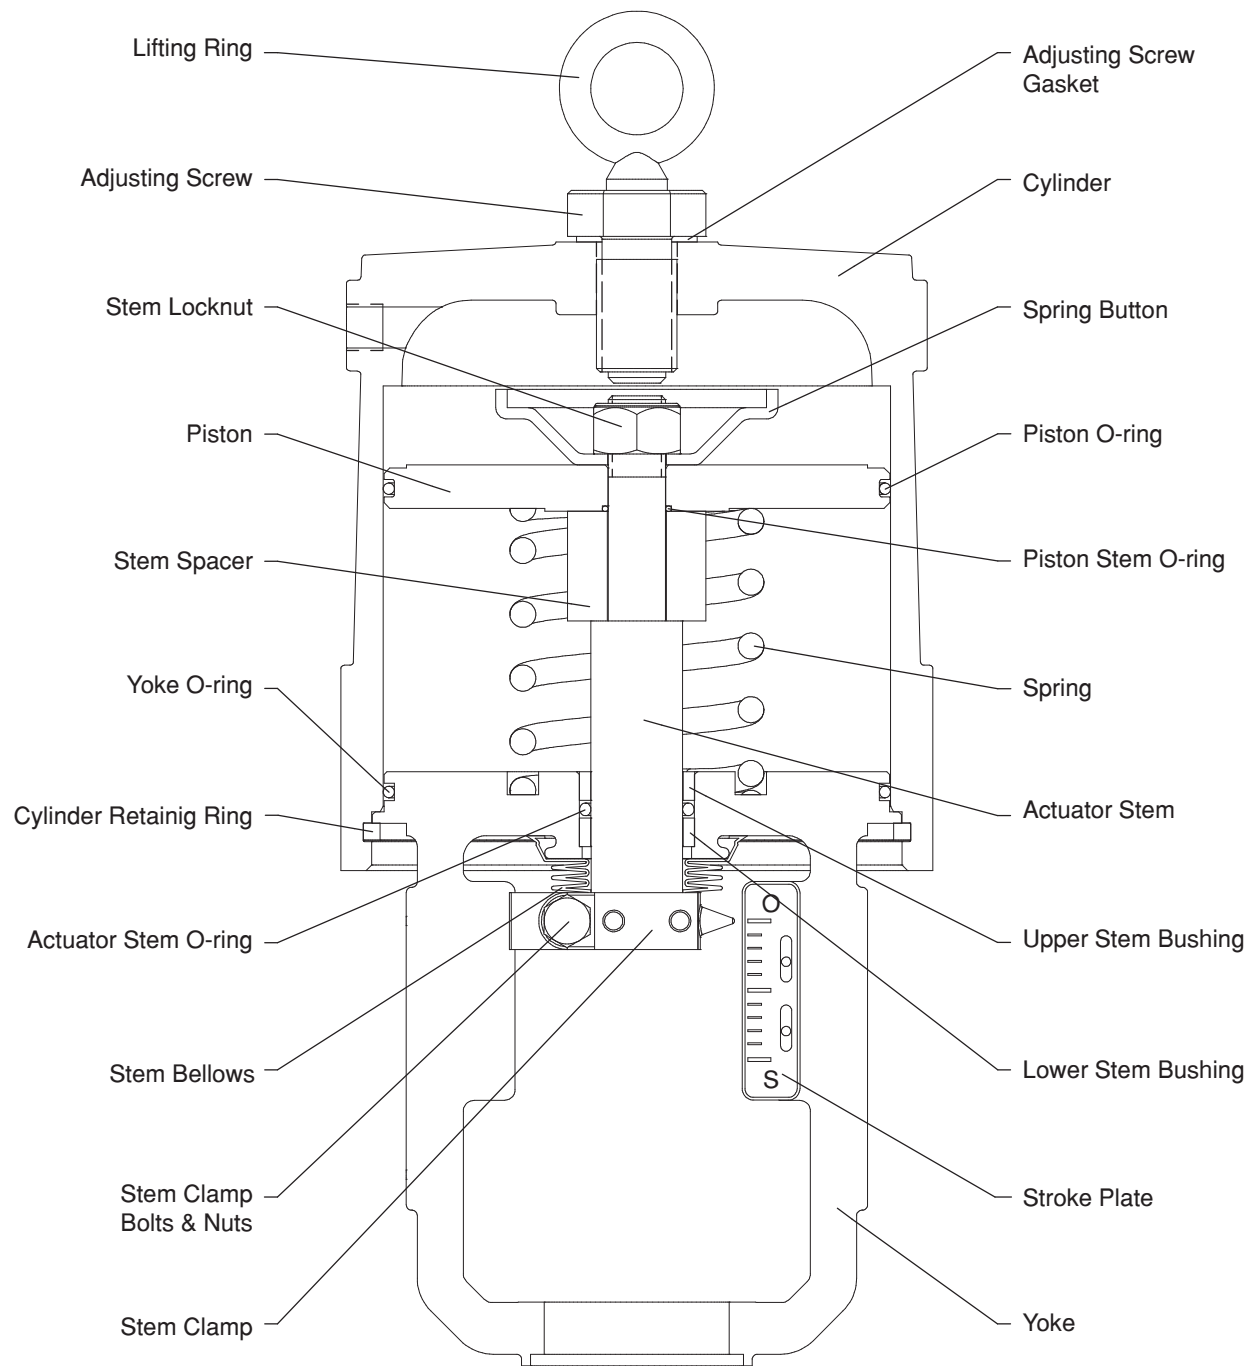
Spring-Cylinder Actuator (Air-to-Extend)
